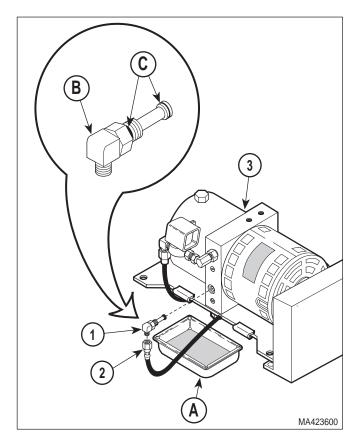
Up Functions Shuttle Valve Removal / Installation
